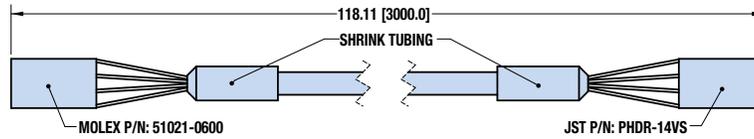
Encoder Cable 3604-1768 /1769/1969
